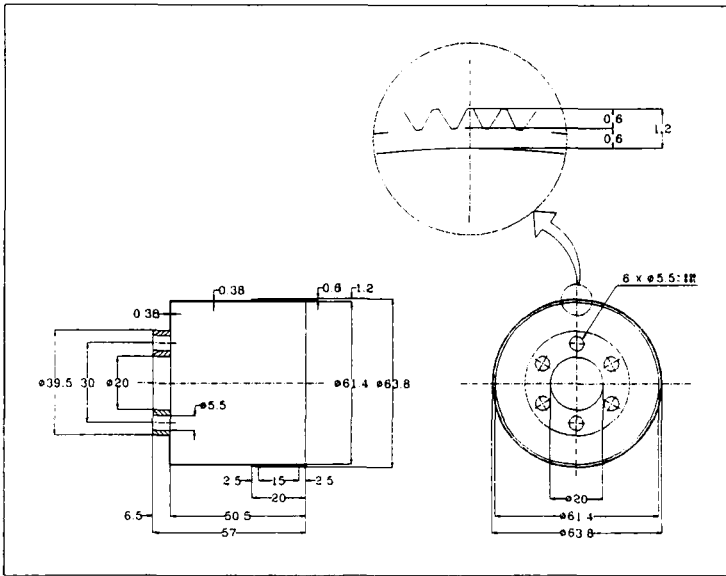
Dimensions of the manufactured cup-type steel flexspline.
